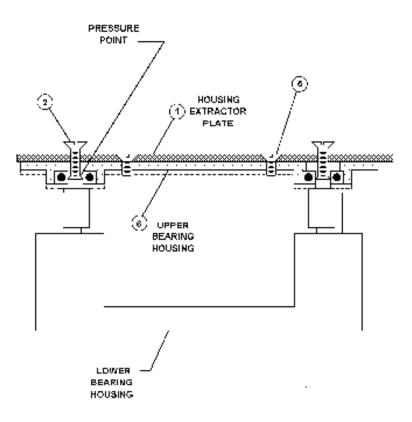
Bearing Housing Assemblies (with extractor plate in place)
